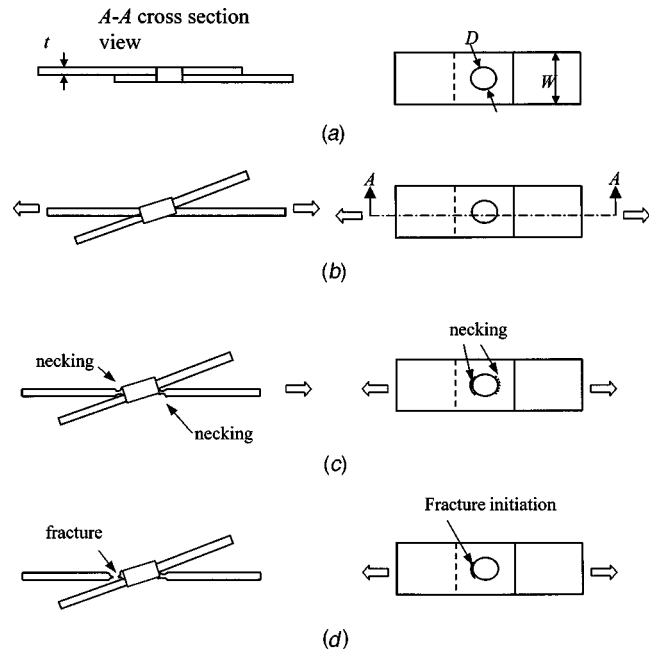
Global deformation and failure process of a lap-shear spot-weld sample: (a) initial configuration, (b) nugget rotation (align first with the loading line); (c) stretching, thinning, and necking, and (d) tensile fracture due to localized necking.
